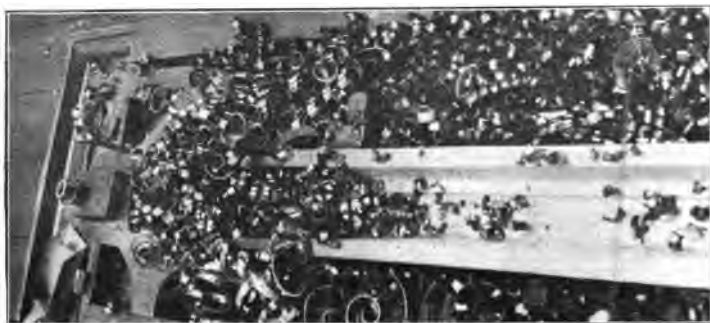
PHOTOGRAPH SHOWING THE LARGE CHIPS REMOVED BY HIGH-SPEED STEEL IN FLUTING MAIN RODS. IN THE TESTS 780 LBS. OF METAL WERE REMOVED PER HOUR WITH ALLOY STEEL AS AGAINST 288 LBS. WITH CARBON STEEL.
